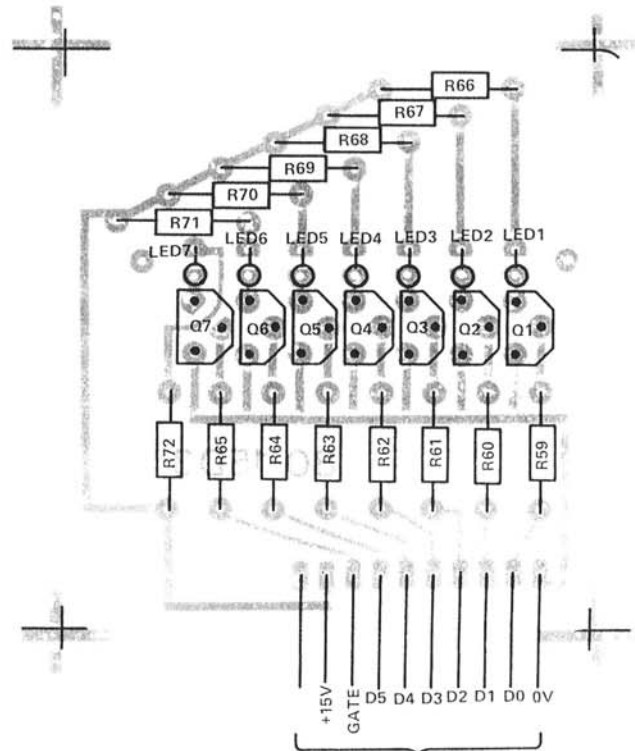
Component overlay of the keyboard controller status indicator. CONNECTS TO PCB 80-15D2
